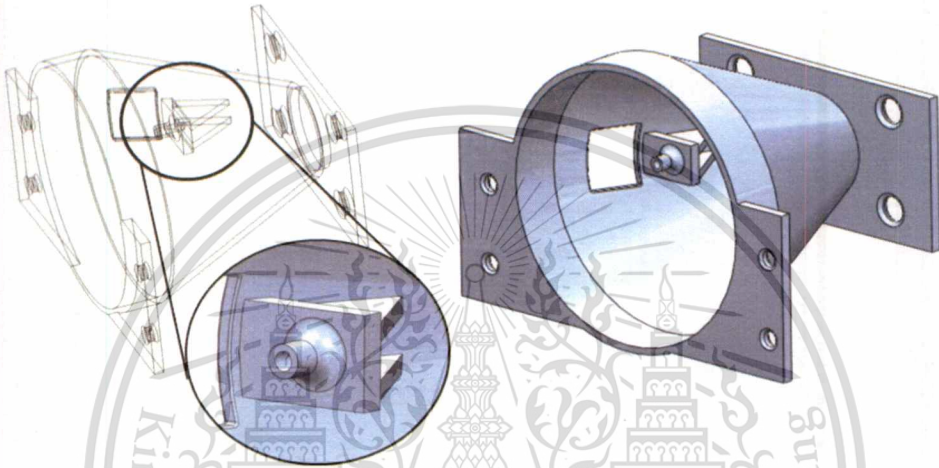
Clutch housing CAD model with a pivot mounting.
